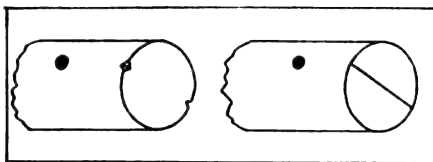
A Useful Suggestion for Locating Cotter Pin Holes.
